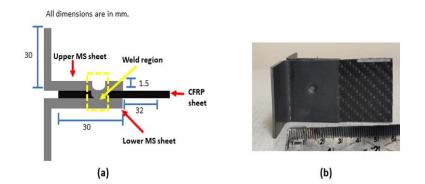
a)Schematic diagram of CFRP of 1mm thickness with Mild steel sheet of 1.5mm thickness join by Resistance spot welding.
